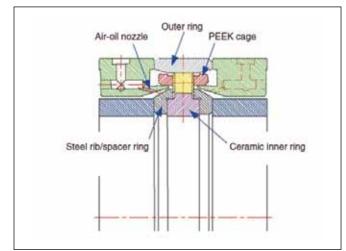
N-type cylindrical roller bearing with ceramic inner ring.
